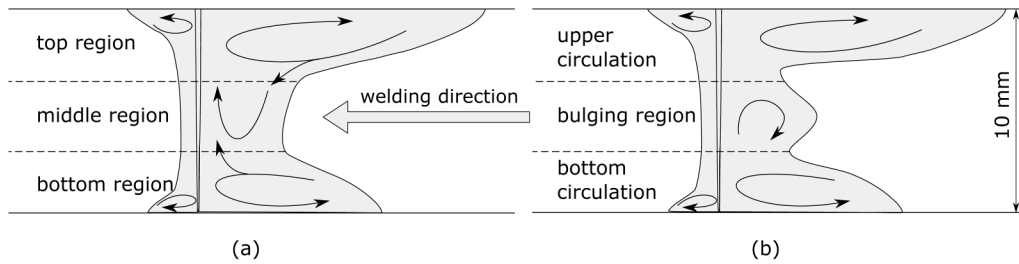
Comparison of different exemplary weld pool shapes for full-penetration welding. (a) Typical weld pool shape with three-dimensional flow routes across all areas. (b) Untypical weld pool shape with narrowed region thus being disadvantageous in terms of potential vertical flow channels.
